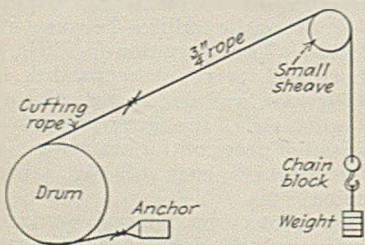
Method of Smoothing Grooves With Cutting Rope at One End of Cylindro-Conical Drum.
